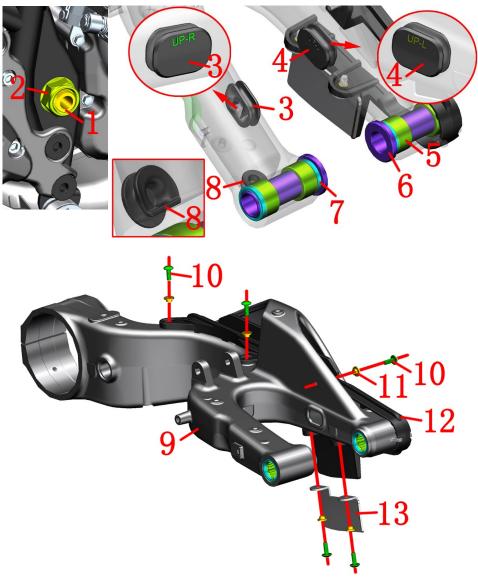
F	Rear wheel,	Rear wheel assembly	CHK	401
